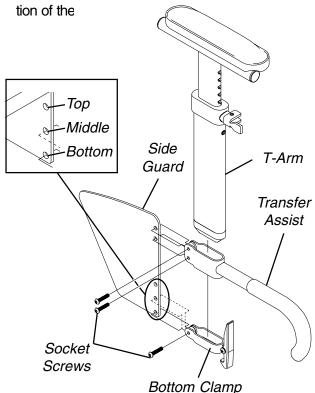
ADJUSTING THE T-ARM TRANSFER ASSISTS AND/OR SIDE GUARDS
